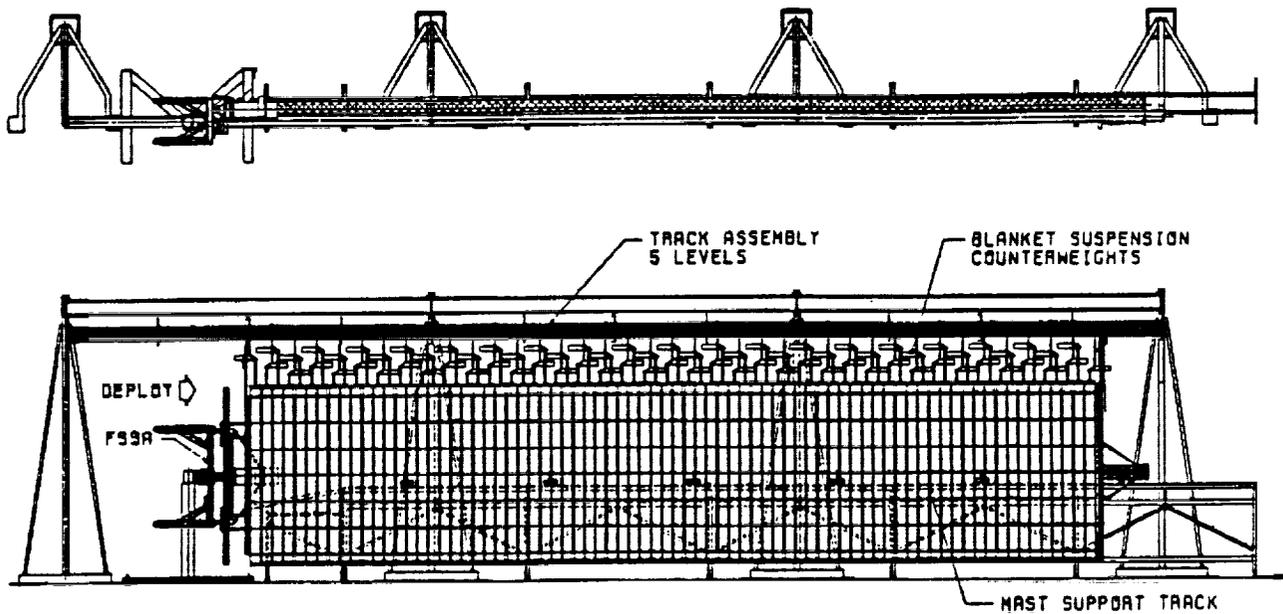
HORIZONTAL DEPLOYMENT GROUND TEST FIXTURE
